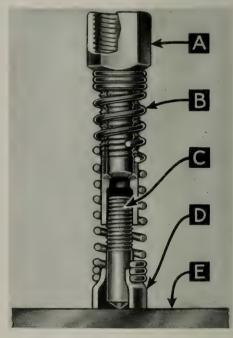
Cutaway view of chuck-spring-stud-ferrule assembly in position for welding. (A) chuck; (B) spring; (C) stud; (D) ferrule: (E) steel plate.
